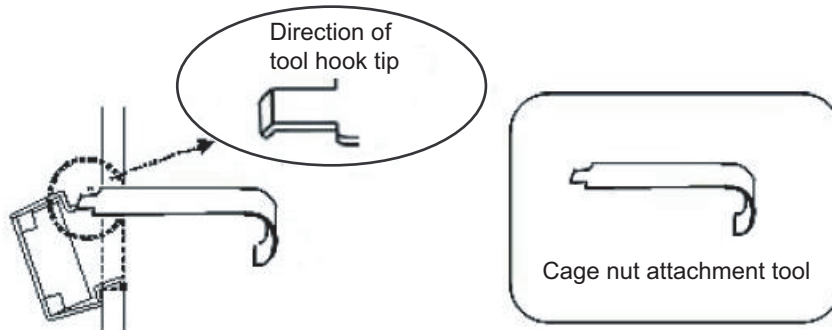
shows a cage nut hooked on the lower part of the hole.
